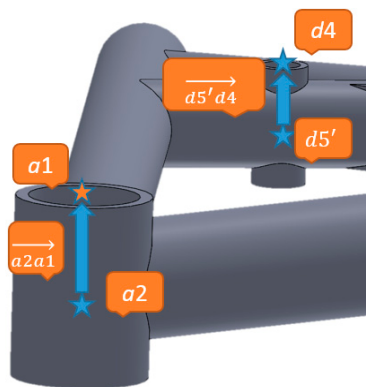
The parallelism between B.B. and T/T rotating shafts.
